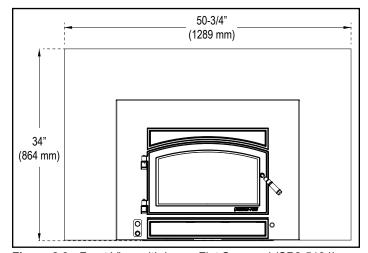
Front View with Large Flat Surround (SP2-5134)
